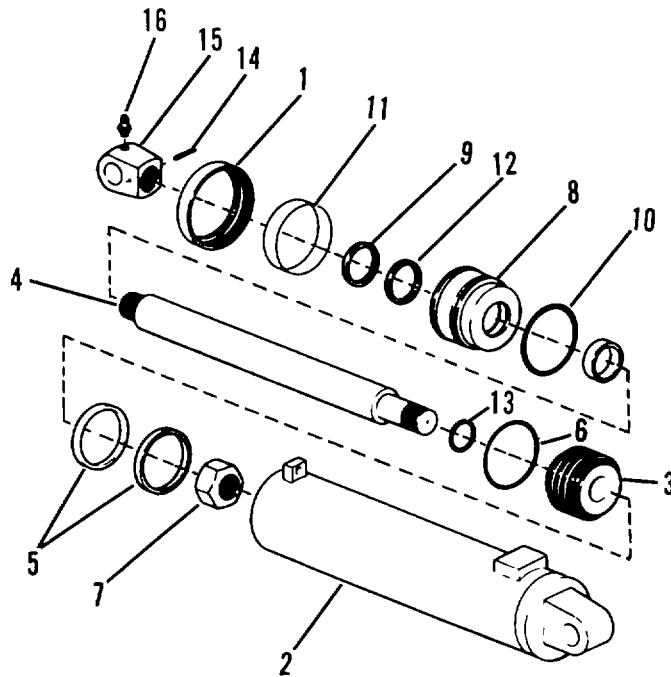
Lift Cylinder Assembly (Sheet 1 of 2) .
